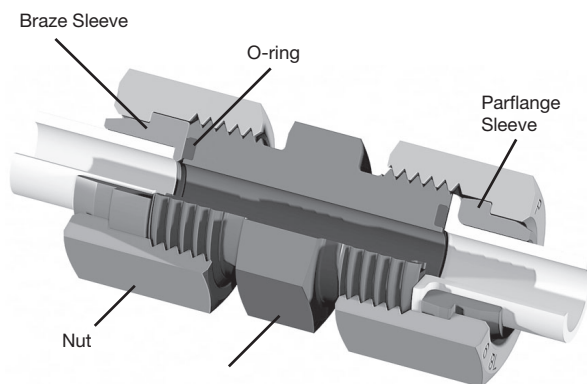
Seal-Lok Union cutaway with flanged and brazed assemblies
